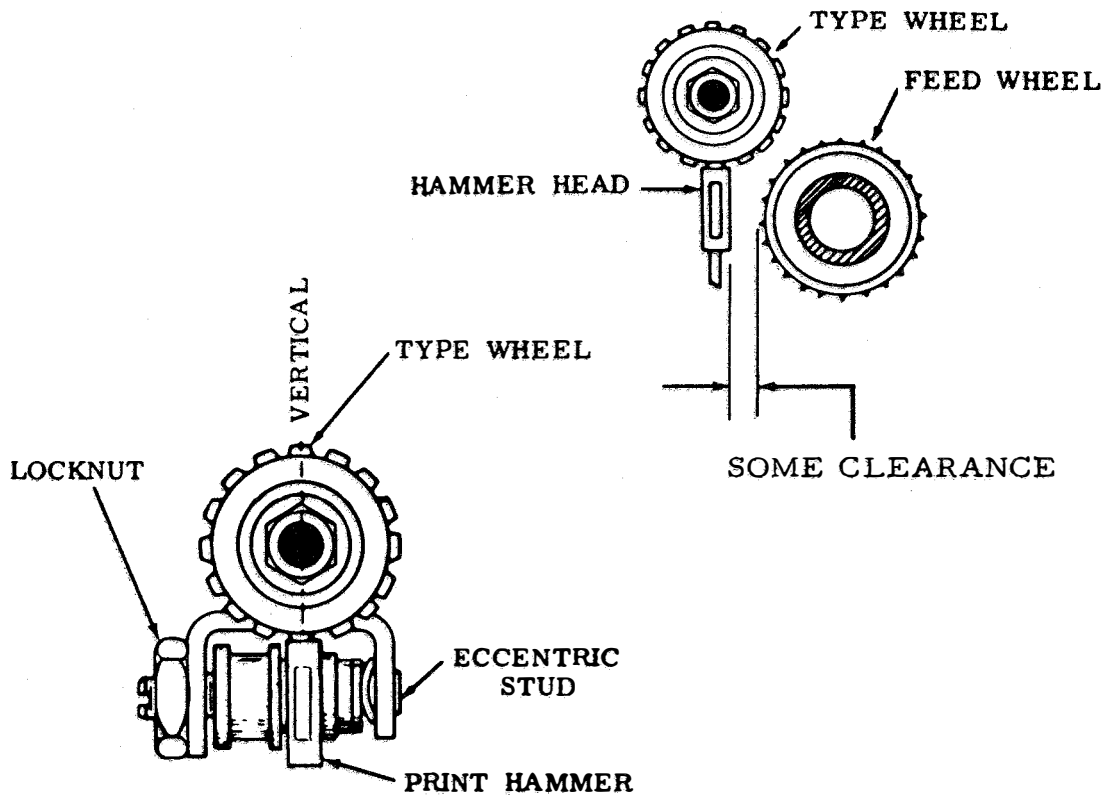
Print Hammer (For Fully Perforated Tape), Front View
